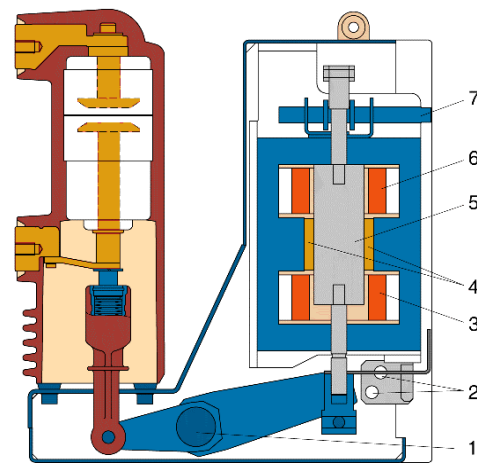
Section of the operating mechanism and pole part of the vacuum circuit-breaker
